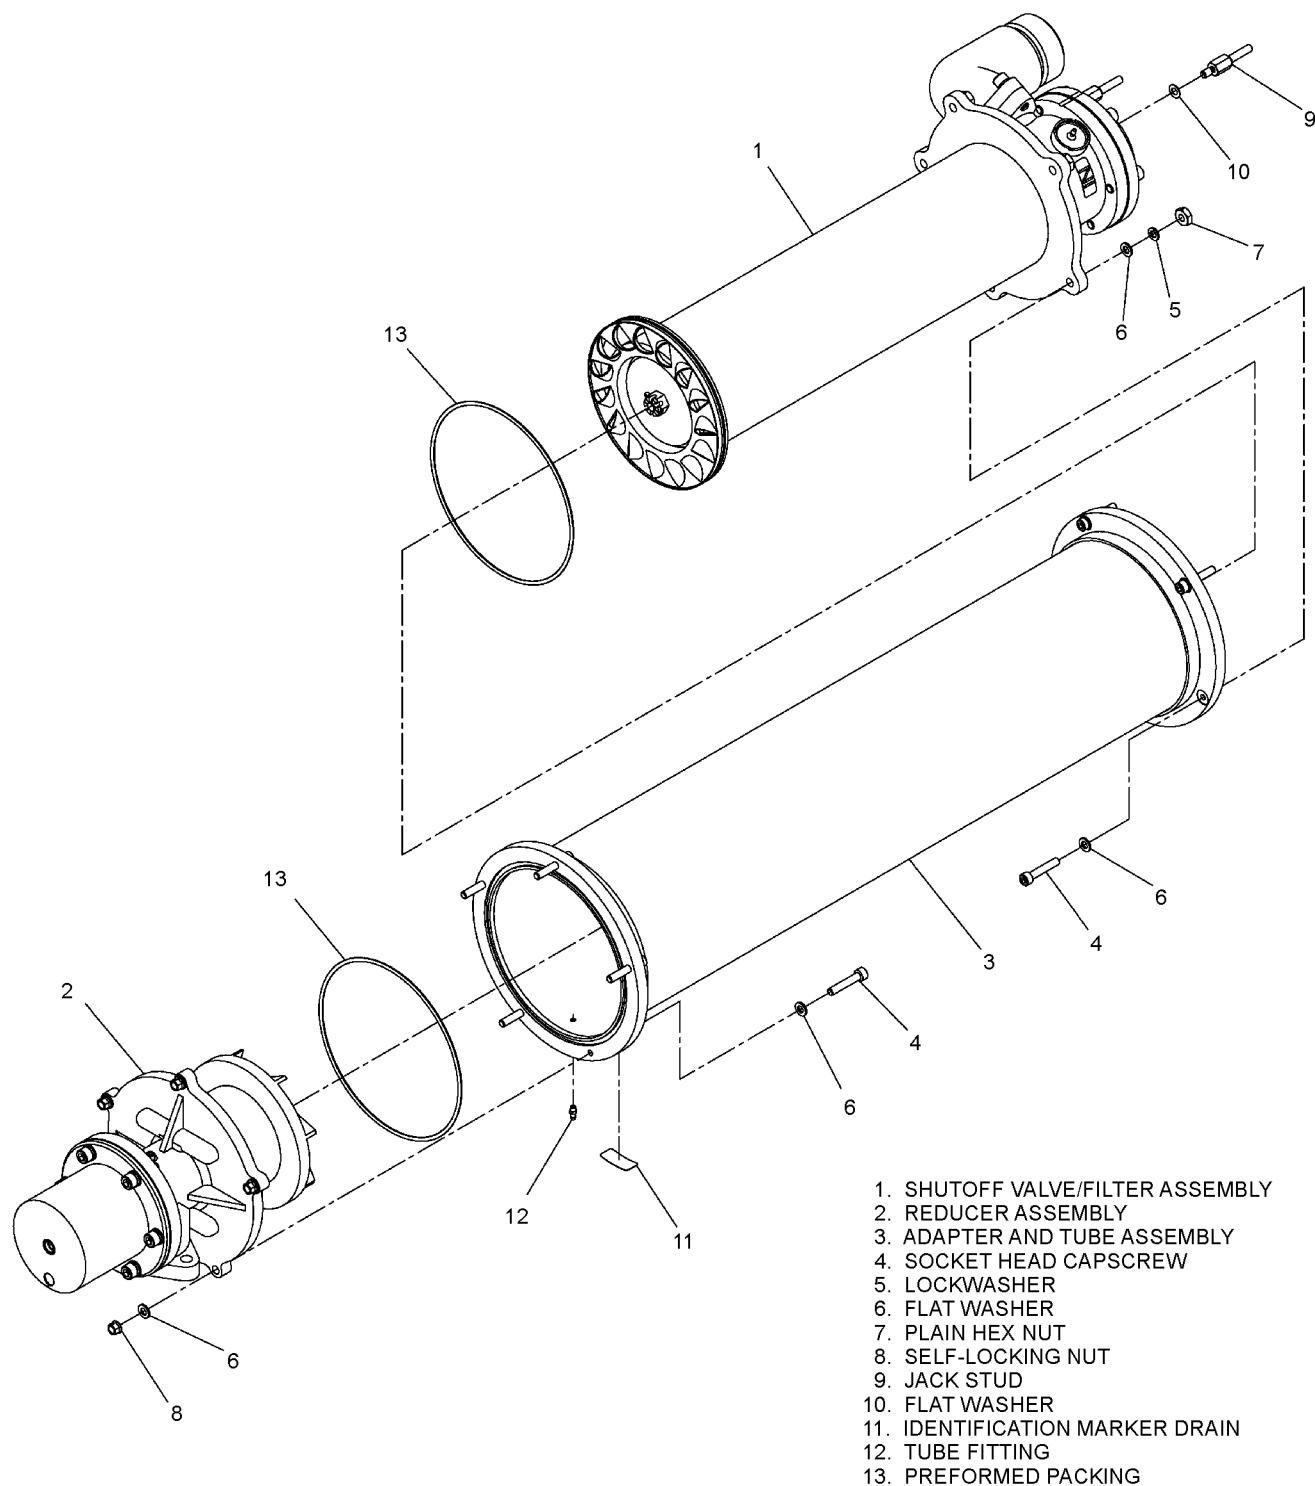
Shutoff Valve, Filter and Regulator Assembly, P/N 1653720-1
